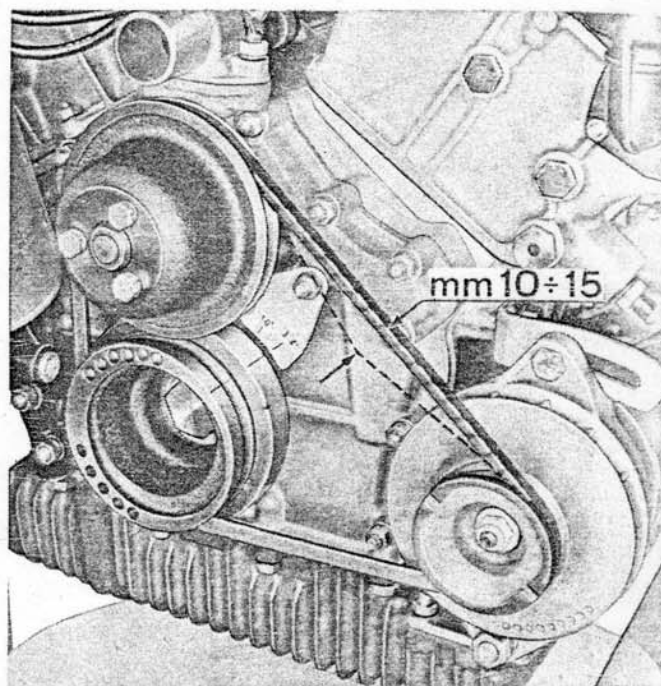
Deflection of alternator and water pump drive belt with a pressure of 22 lbs (10 kg).
